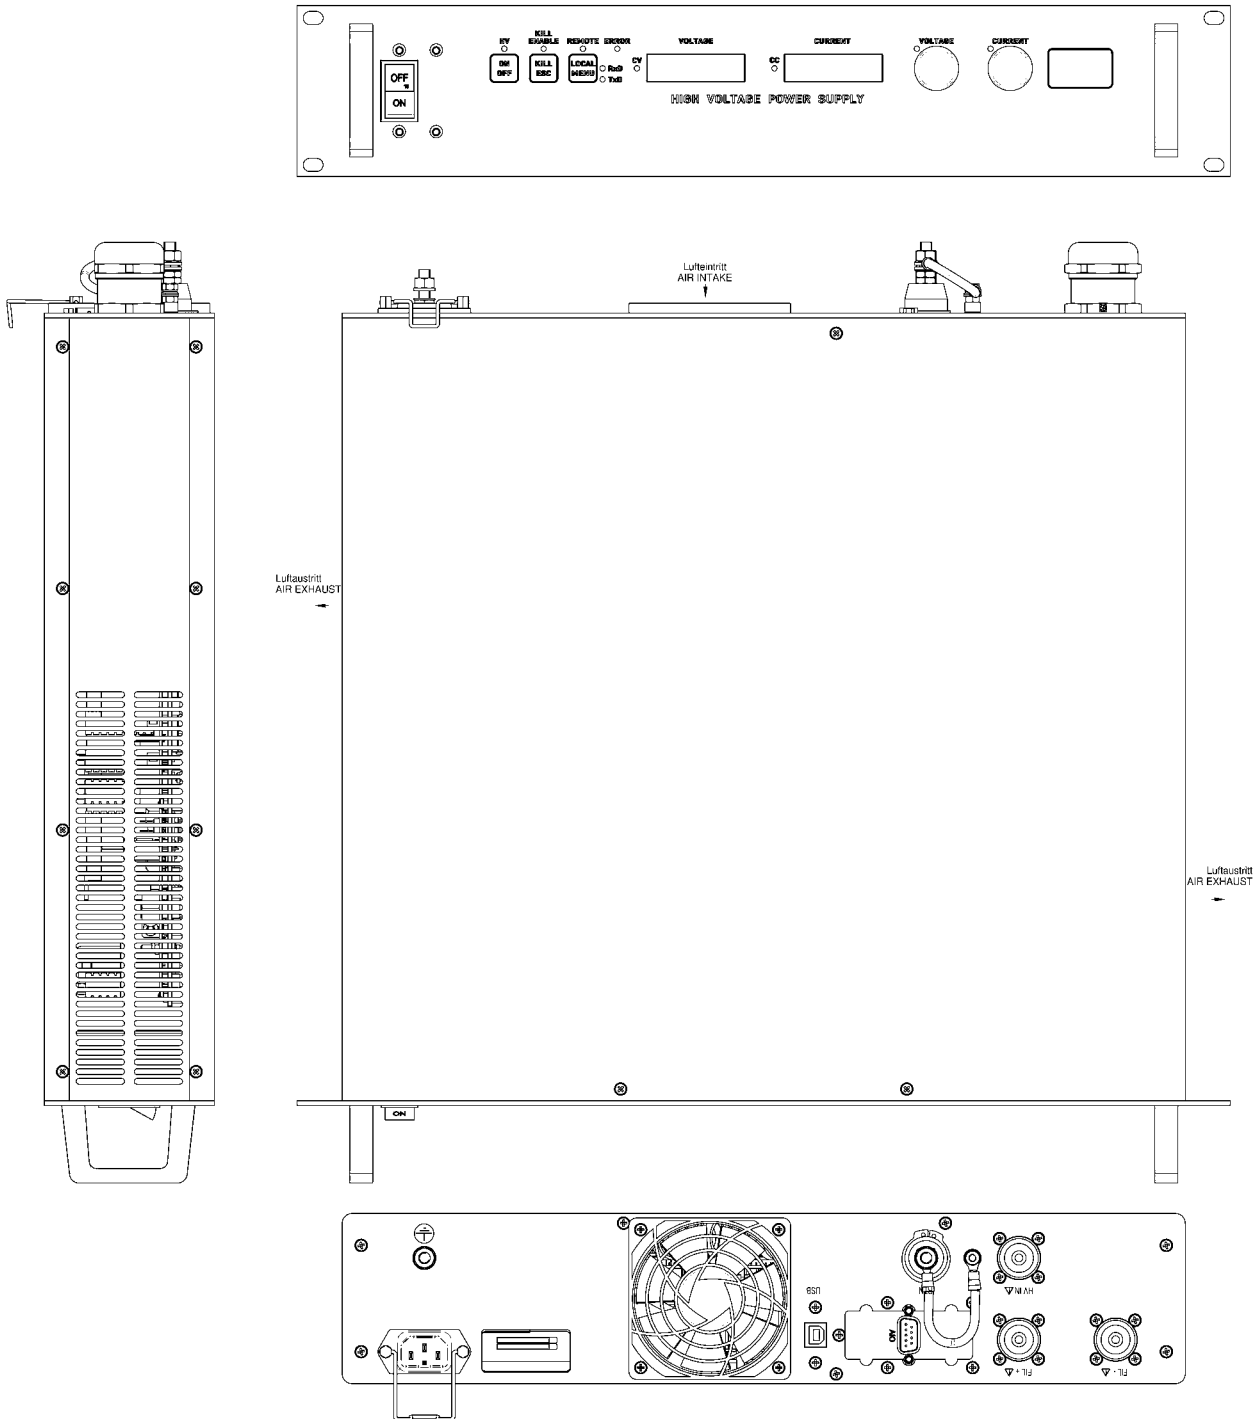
Dimensioned drawing (in mm), with option front panel control
